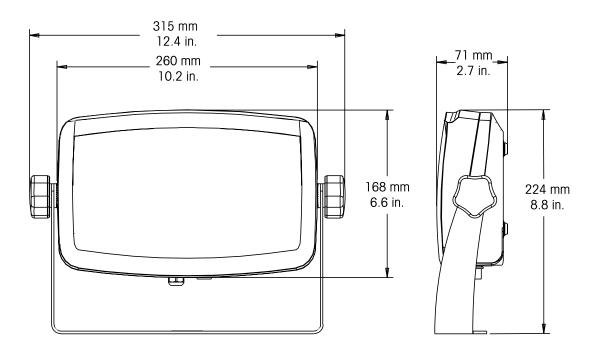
T51P Indicator Overall Dimensions with Mounting Bracket.
